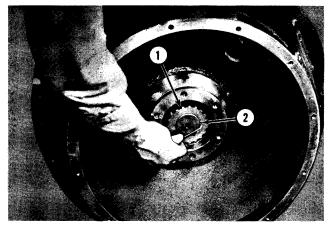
REMOVING LOCKNUT SETSCREW
